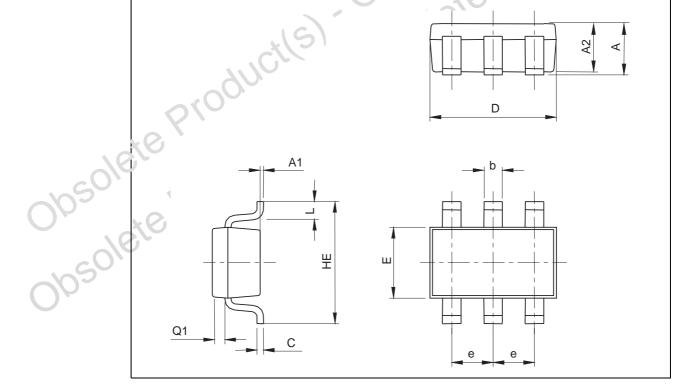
SC70-6 (or SOT323-6) package footprint (in millimeters)
